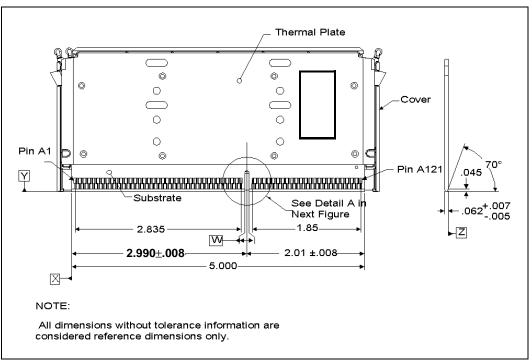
S.E.C.C. Packaged Processor — Extended Thermal Plate Attachment Detail Dimensions, Continued
